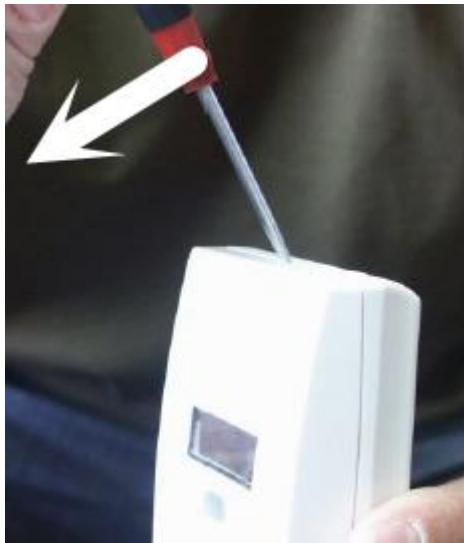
Closed housing seen from the side. The housing is opened by inserting a screw driver and pushing left (to the front side). The locking hooks will then be released.
